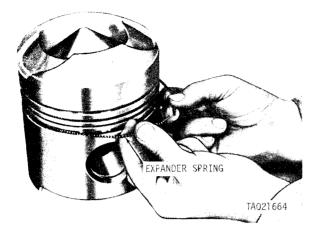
Removing or installing oil control piston ring expanded spring.
